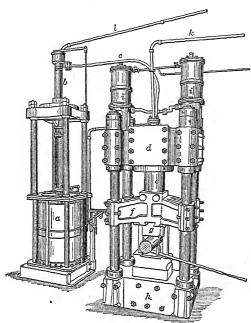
Hydraulic press of Breuer, Schumacher & Co.
